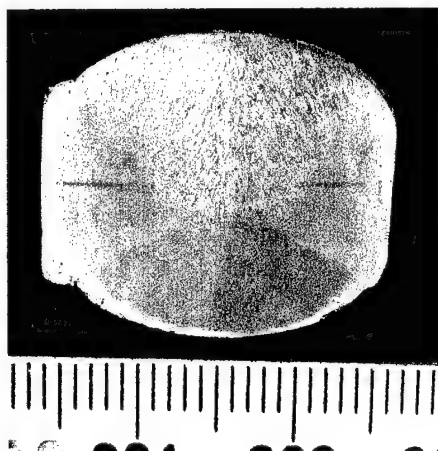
Weld cross-section at the region of wider gap showing complete penetration when welded from both sides. The two welds overlap to achieve full penetration.
